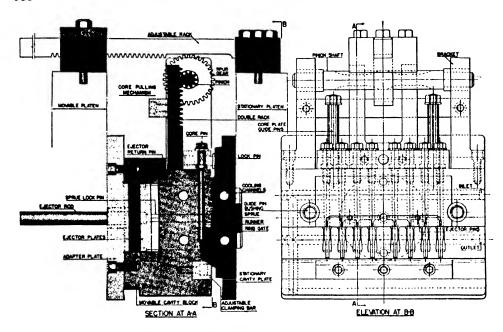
Cigarette-holder mouthpiece mold.
